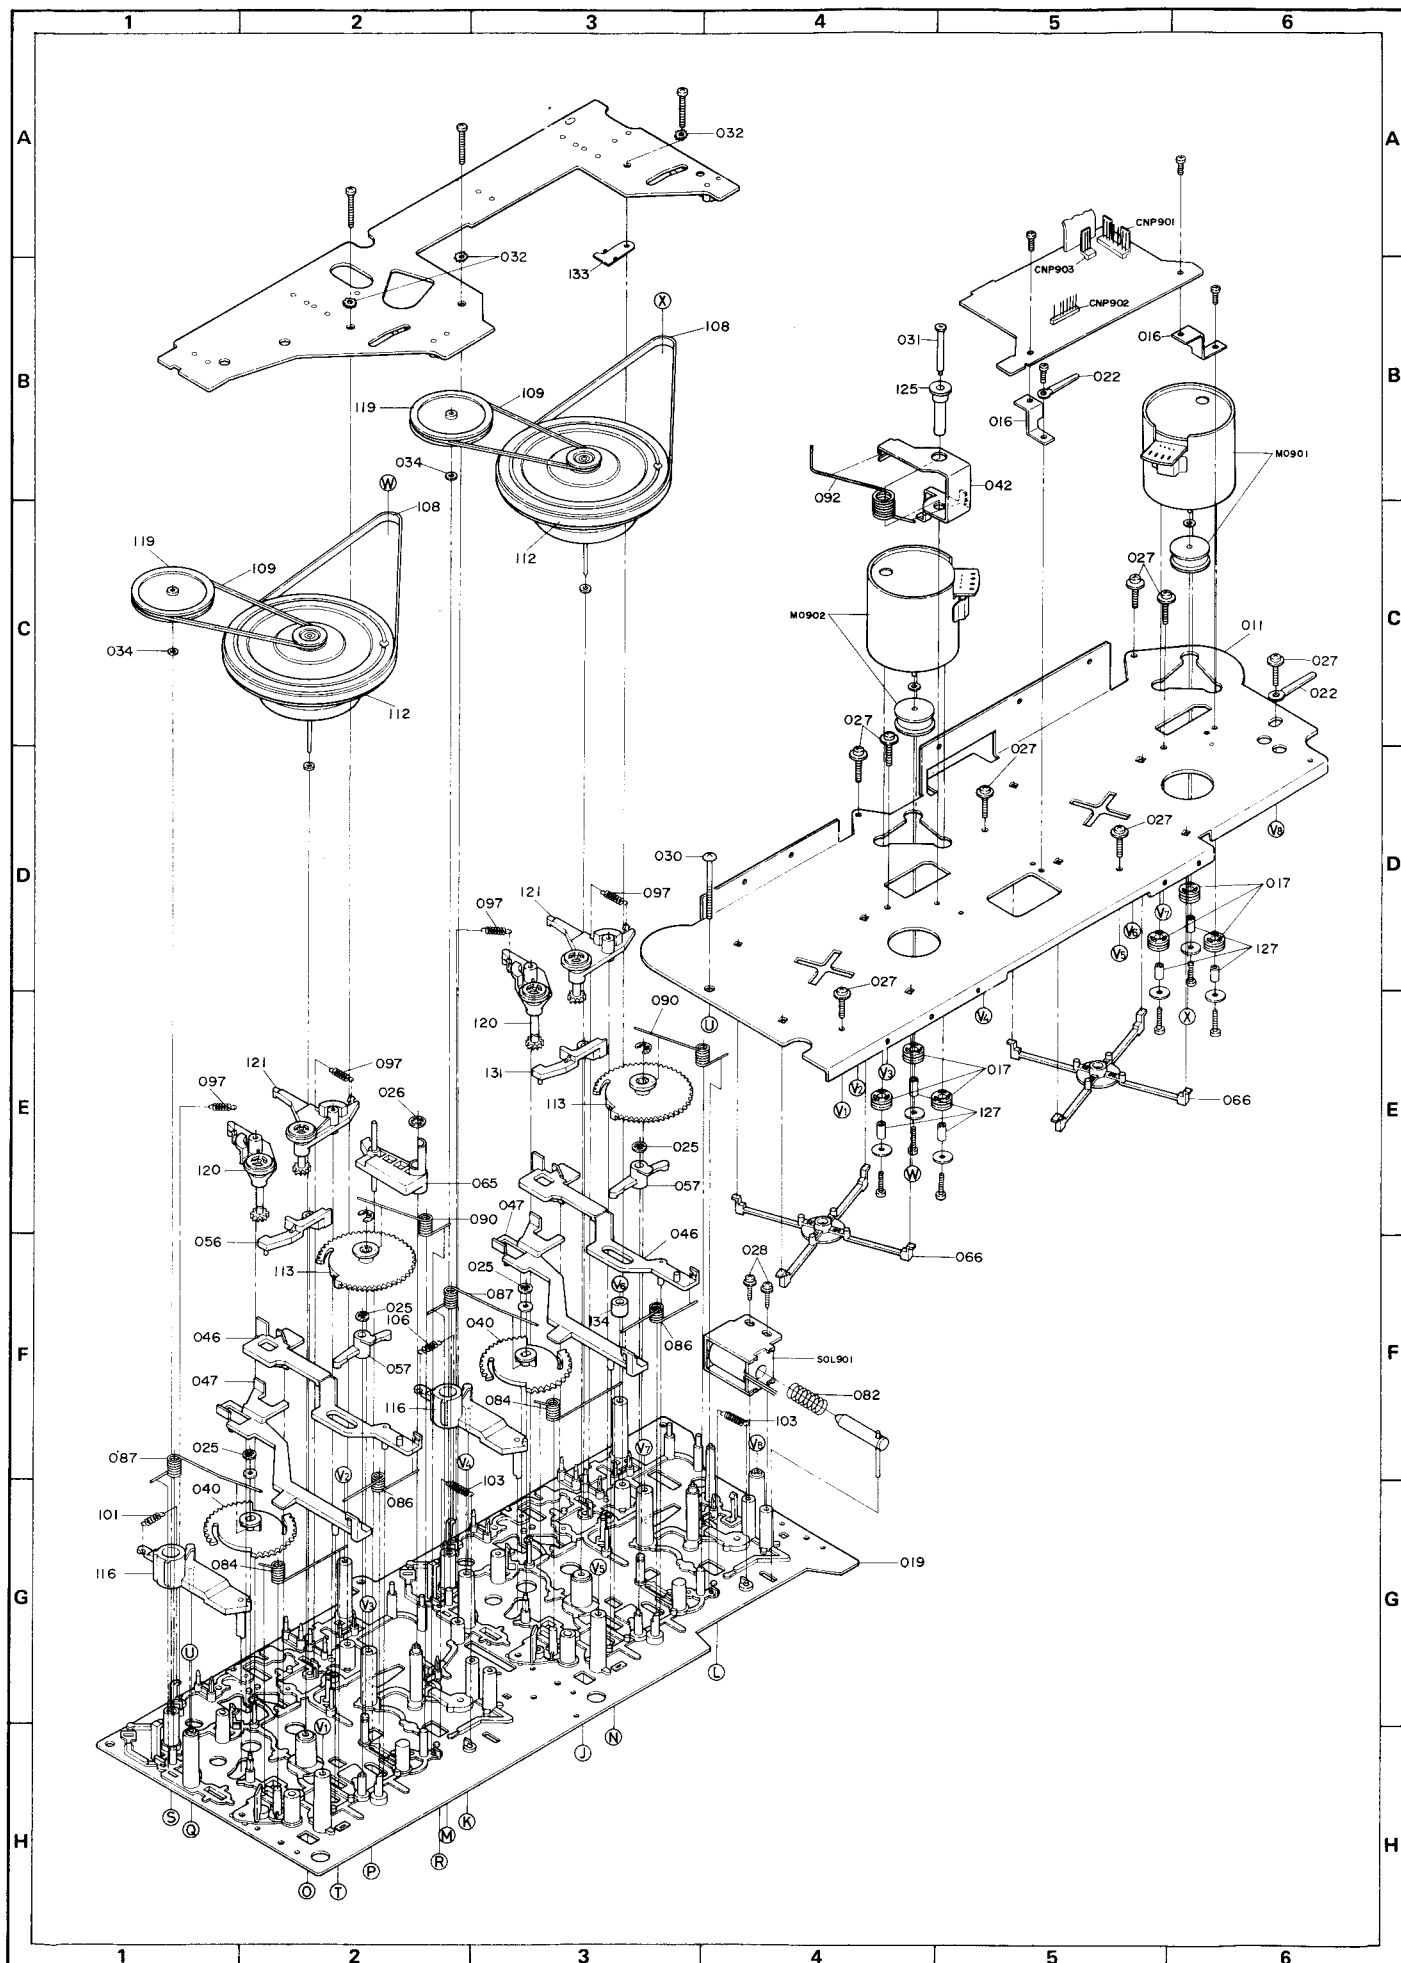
MECHANISM EXPLODED BOTTOM VIEW
